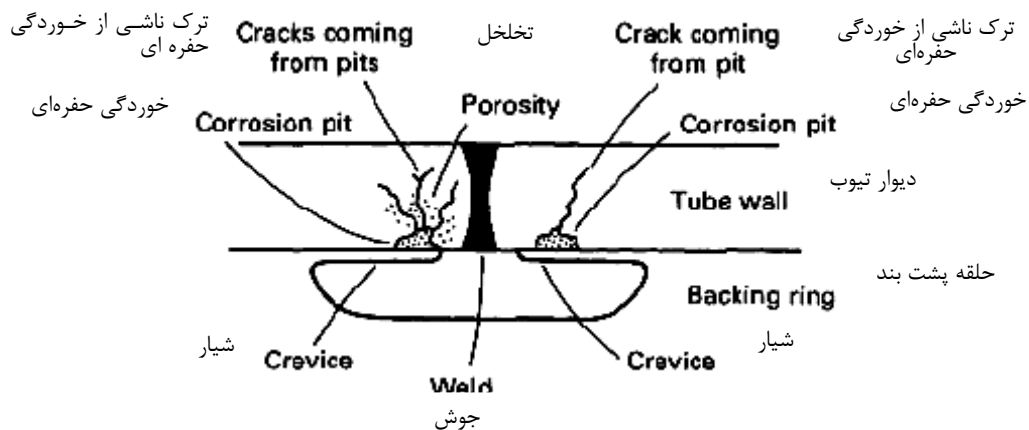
SCHEMATIC OF A STAINLESS STEEL NITRATOR COOLING COIL WELD JOINT. FAILURE WAS CAUSED BY IMPROPER DESIGN OF THE BACKING RING, WHICH WAS NOT CONSUMED DURING WELDING AND LEFT A CREVICE
